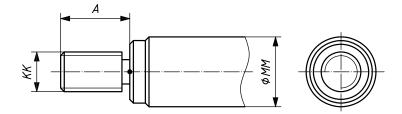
Male thread with shoulder for hydraulic cylinder piston rods
